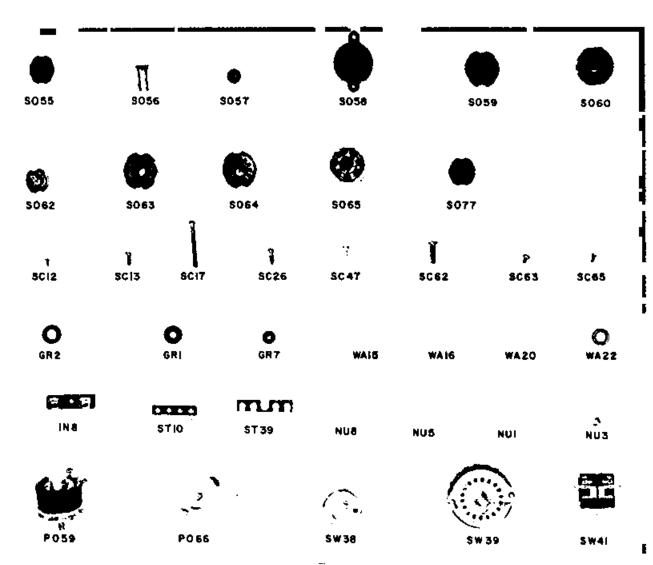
Parts for CONAR Model 224 Tube Tester.
